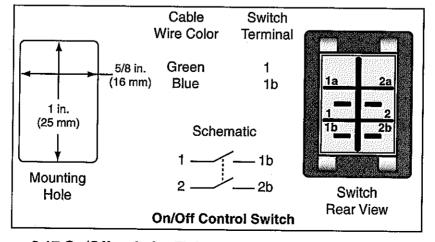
On/Off switch - Fixing hole and connector pinouts
